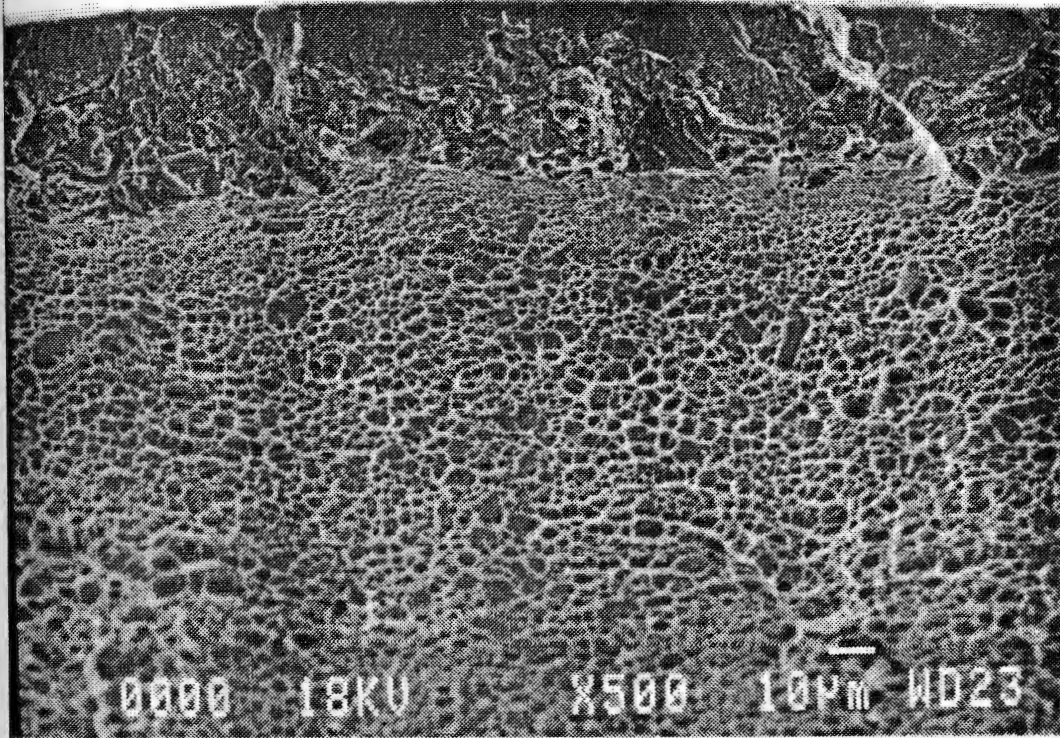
The fracture surface of 1.0 mm, tensile, and exposed specimen of Timetal – 21S with exposure parameters 650 °C, and 40 hrs
